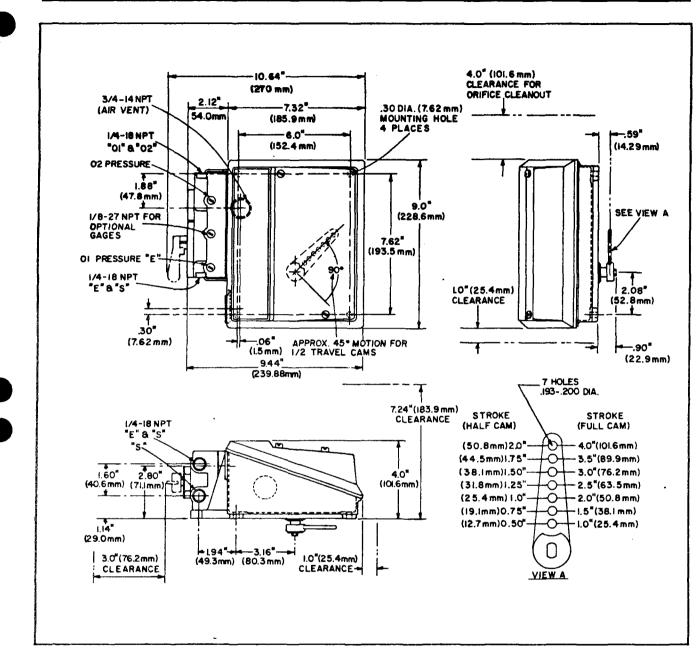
Mounting and External Dimensions of Type AP2 Characterizable Pneumatic Positioner
